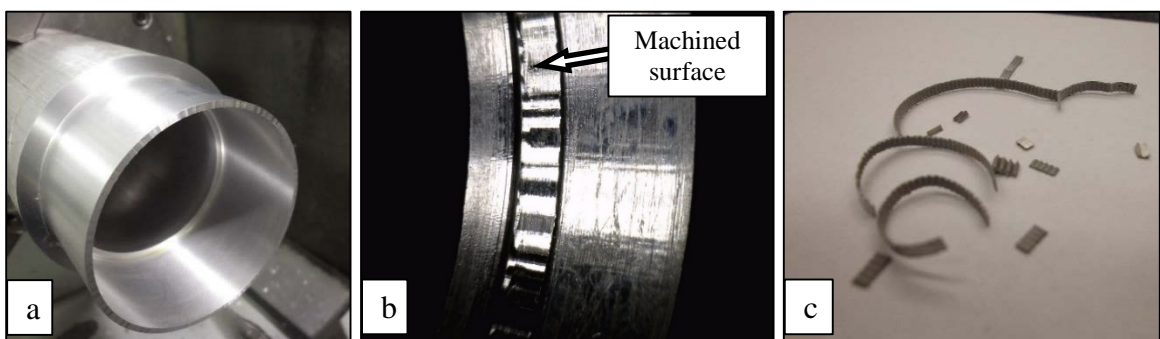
Surface roughness and chip morphology of unstable test cut.
